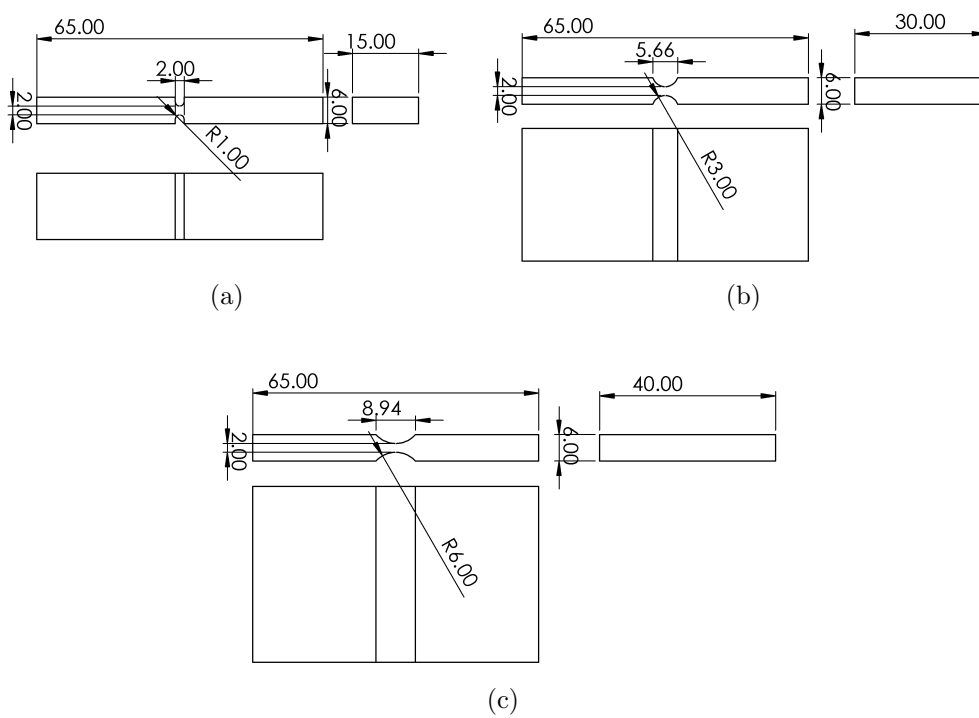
Geometrical details in mm of the grooved plates (7GR1-7GR6).
